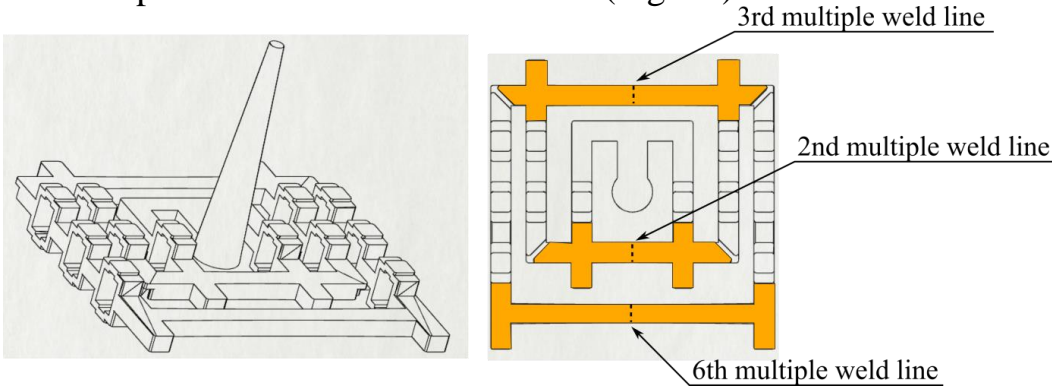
Multiple weld lines integrated in new testing mold design
